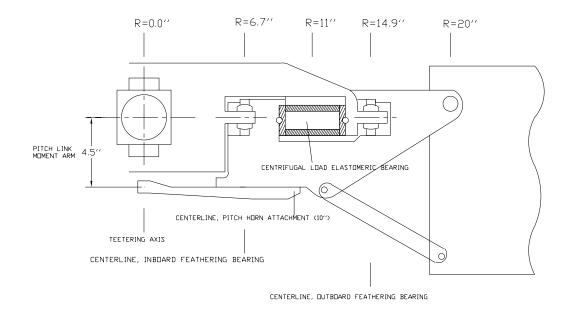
Detailed drawing of the Calvert teetering main rotor hub.
